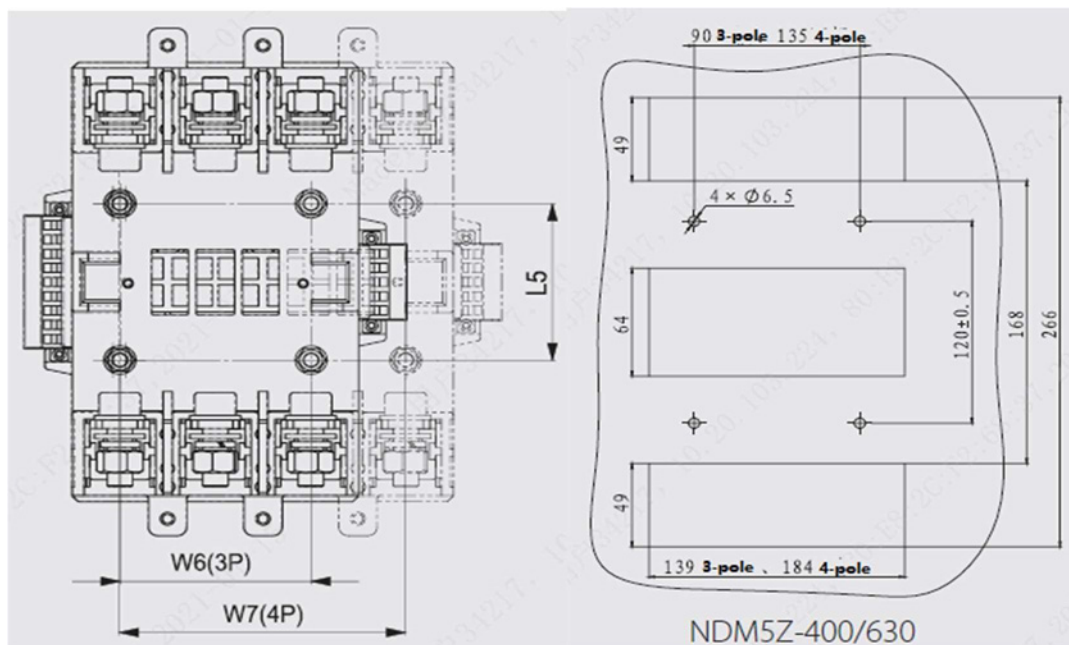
installation dimensions of 3-pole and 4-pole back panel connection products with plug-in, installation holes and plug-in base
